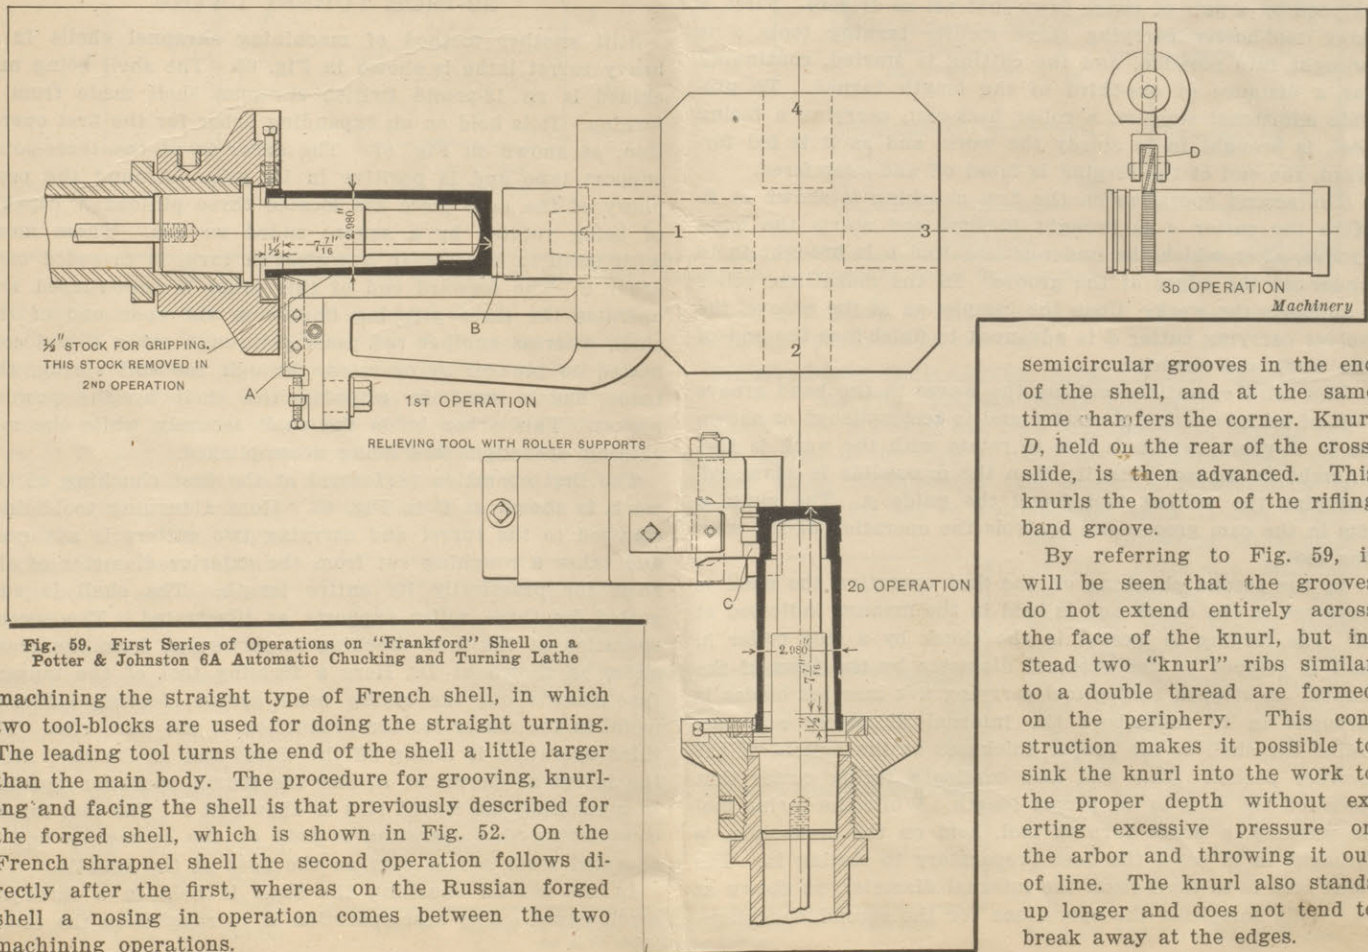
First Series of Operations on "Frankford" Shell on a Potter & Johnston 6A Automatic Chucking and Turning Lathe
